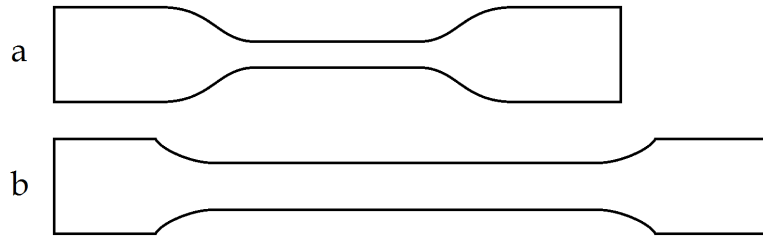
Specimen shape type 1 to scale (a) for pure epoxy and (b) for pure PA-6, see also tables 4.3 and 4.4.
